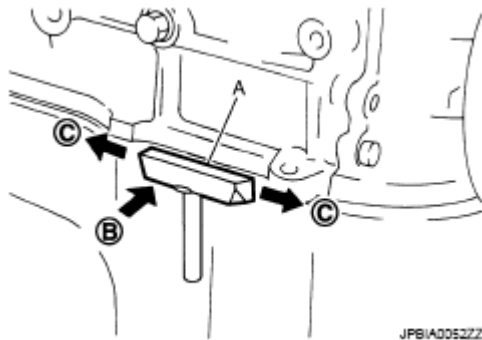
Sliding Seal Cutter By Tapping On Side Of Seal Cutter
